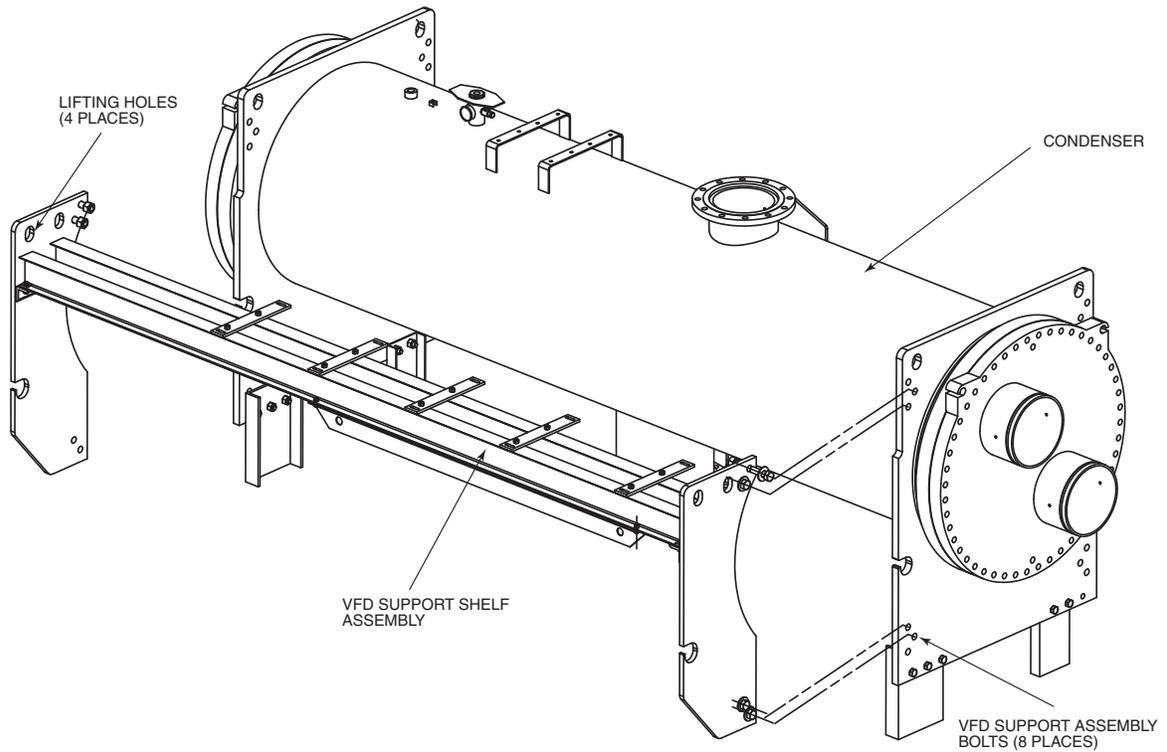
900A or 1200A VFD Support Assembly Installation
